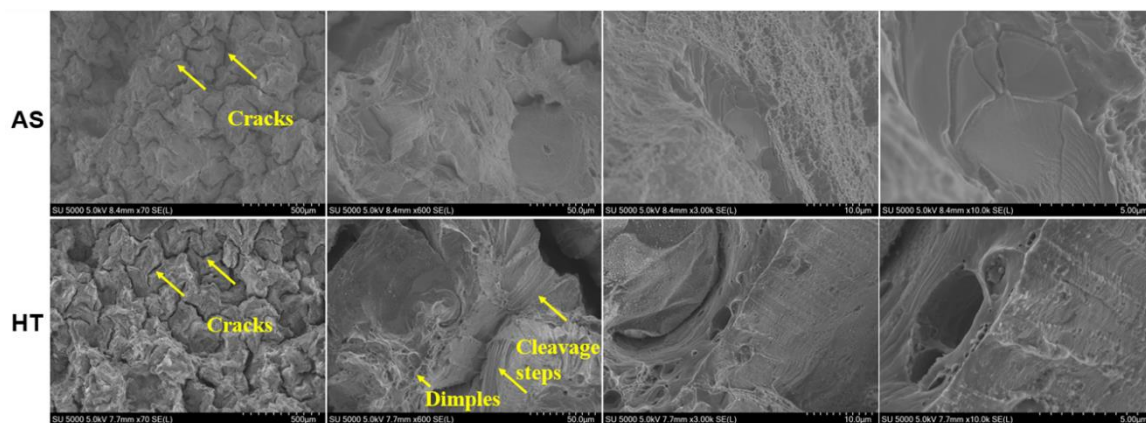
Fracture morphologies of the as-built and HT 6061Al alloys.
